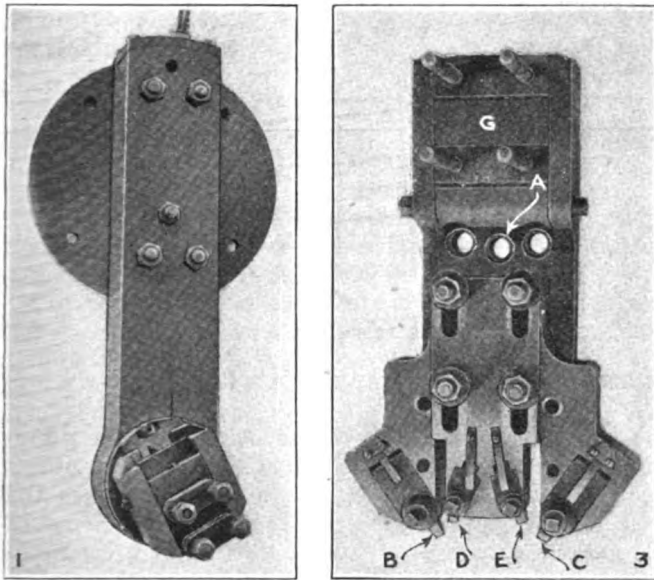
TOOL FOR PLANING CROWN-BRASS SEATS IN DRIVING BOXES. FIG. 3. TOOL FOR PLANING SHOES AND WEDGES
